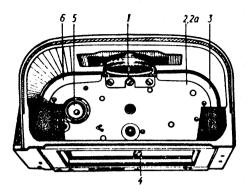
Magazine mechanism housing: 1- screw 8.900.021; 2- housing 6.110.009; 2a- plate 8.610.008; 3- angle 8.665.002; 4- axle-screw 8.318.022; 5- toothed wheel 8.416.062; 6- angle 8.665.001
